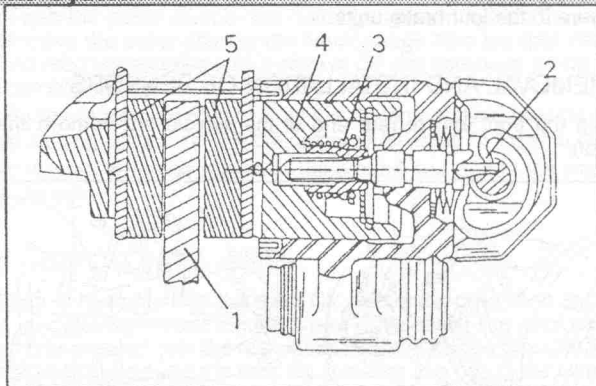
Sectional view of a front brake caliper with details of the hand-brake mechanism.
